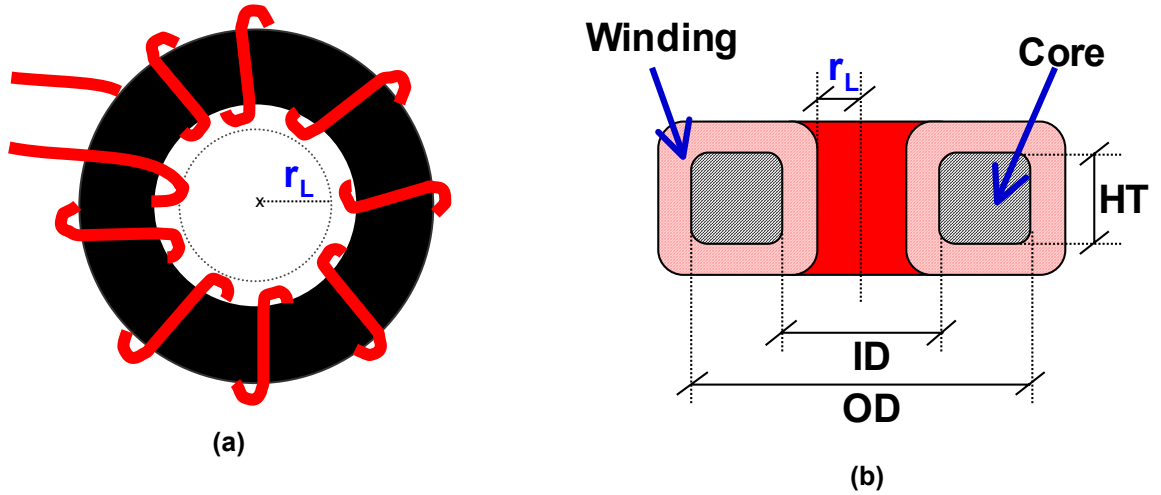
(a) Winding dimensions and (b) cross-sectional view of core and Cu winding.
